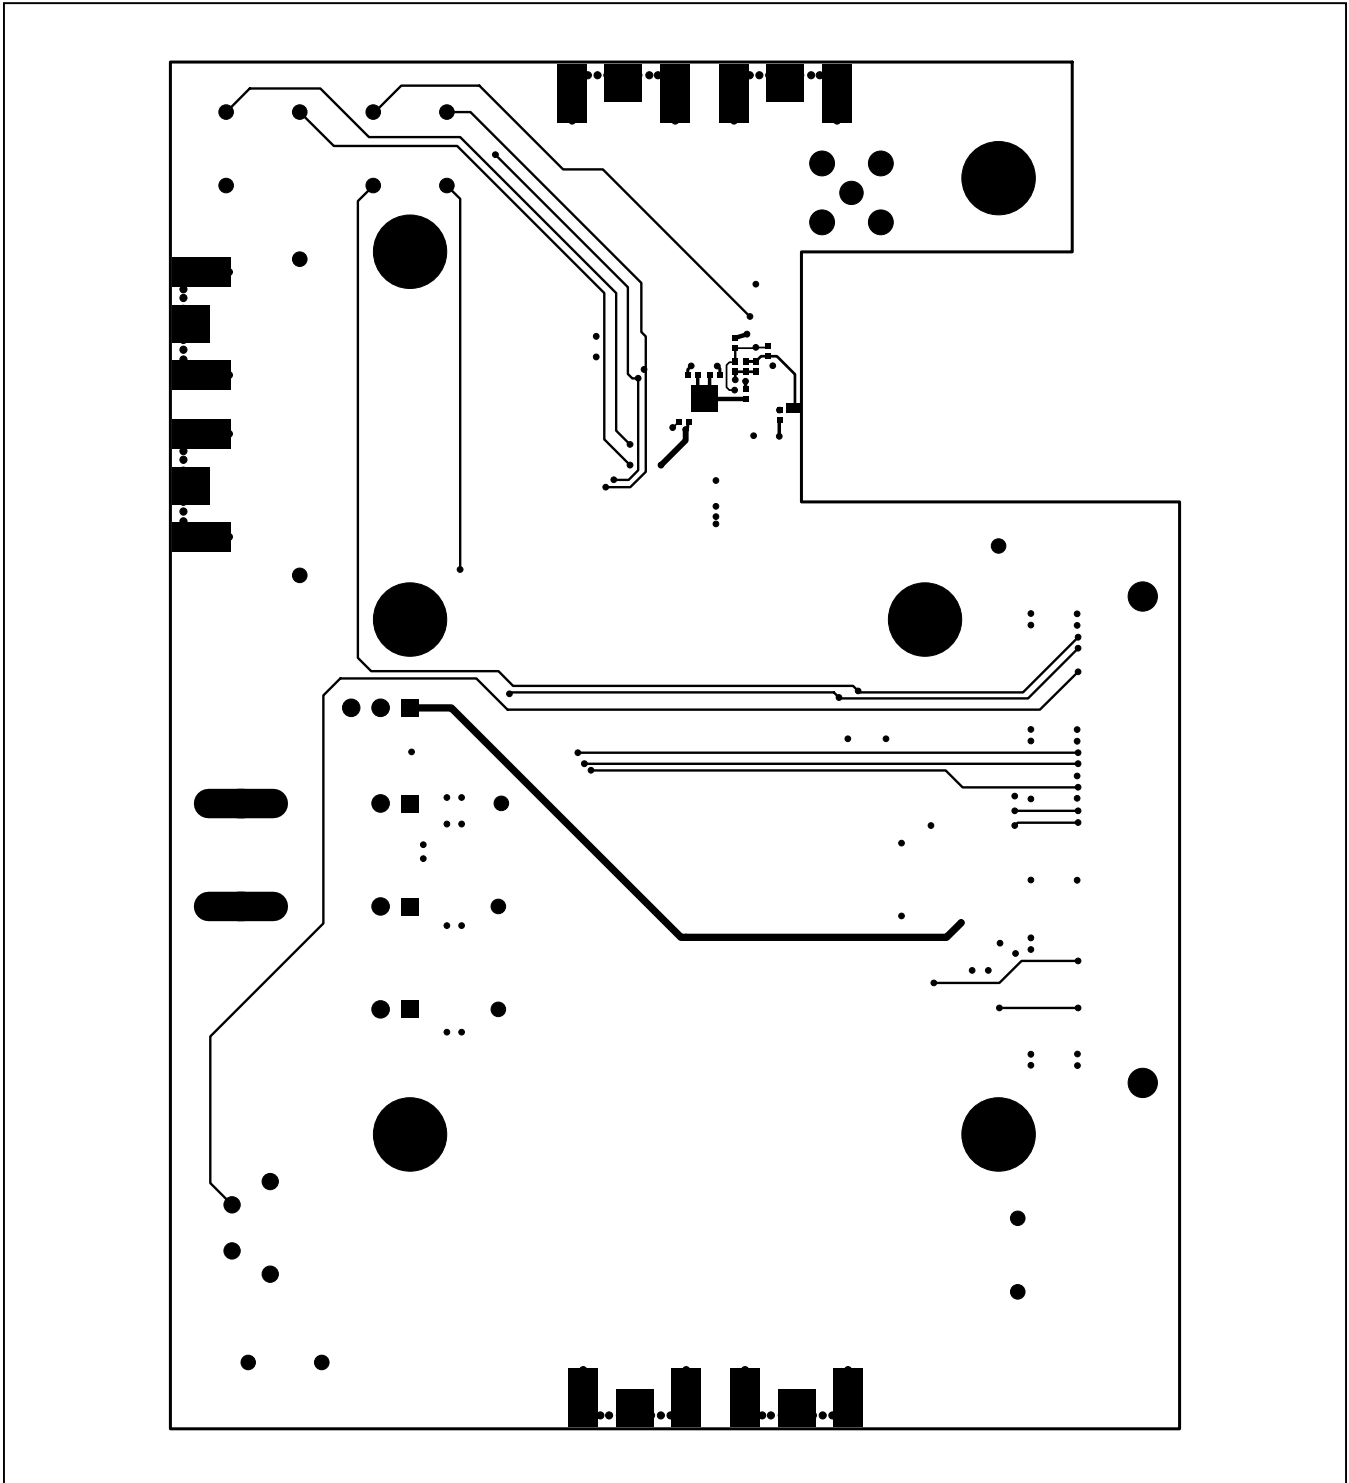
MAX3711 EV Kit PCB Layout—Solder Side
